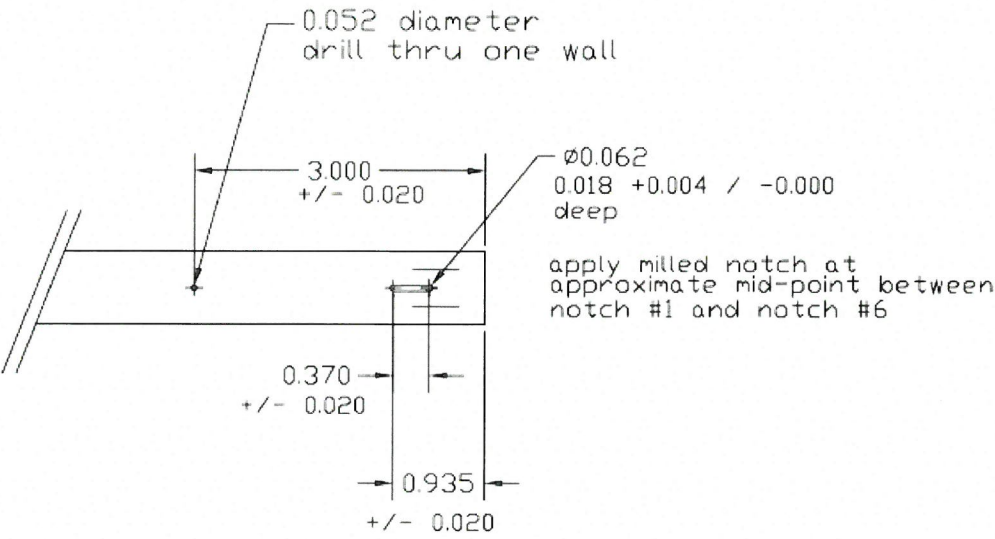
Location of Tube OD Flaws Used for NDE Investigation
